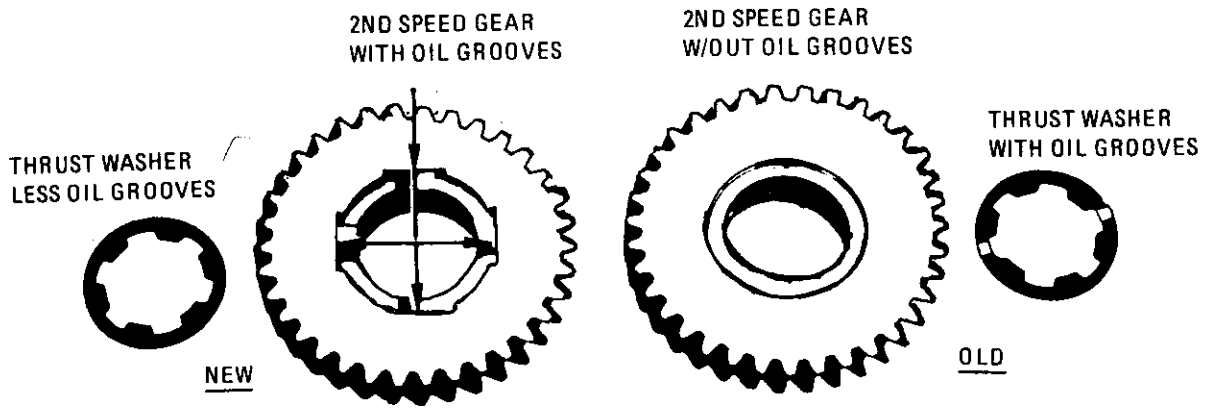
2ND SPEED GEARS WITH AND WITHOUT OIL GROOVES
